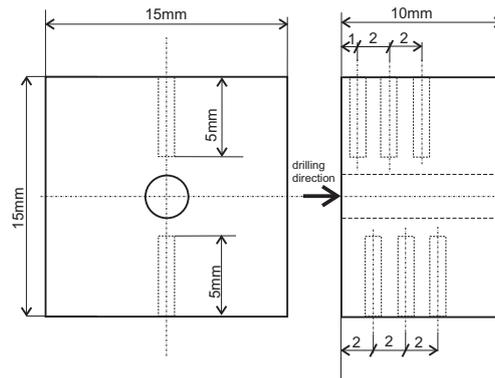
PUR block with designed holes for Thermocouples in perpendicular direction to drilling direction.
